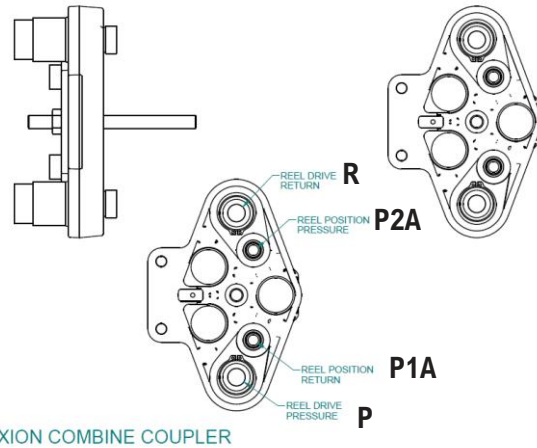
Case and New Holland Multicoupler Plumbing Routing
